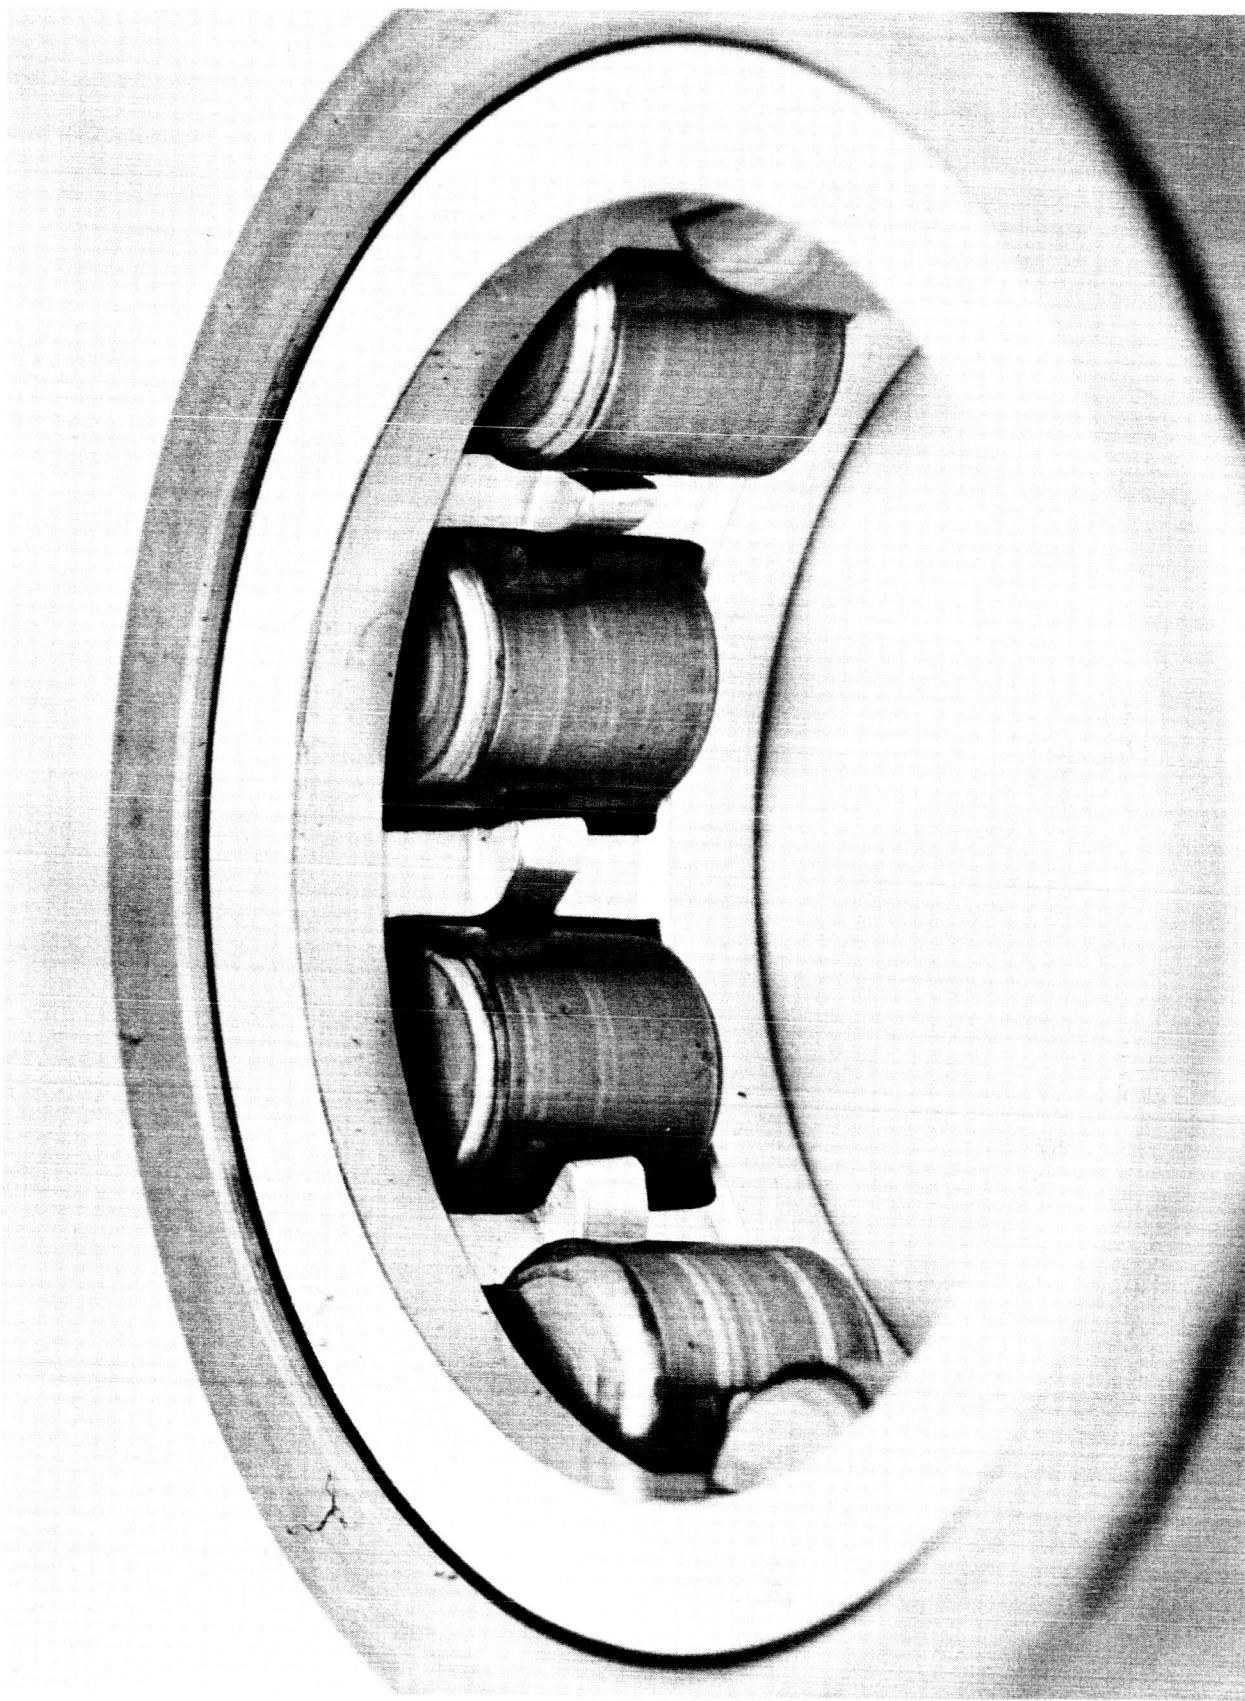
ROLLER BEARING ROLLERS, RETAINER AND OUTER RACE
